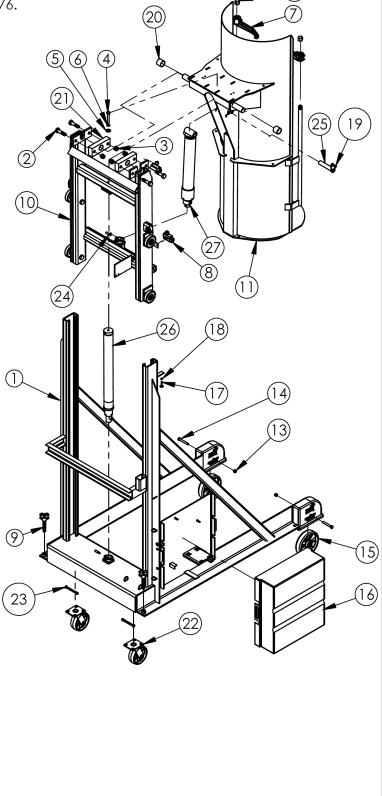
HLD-116-10-S & HLD-116-15-S Exploded View and Bill of Materials (09-006-098)
